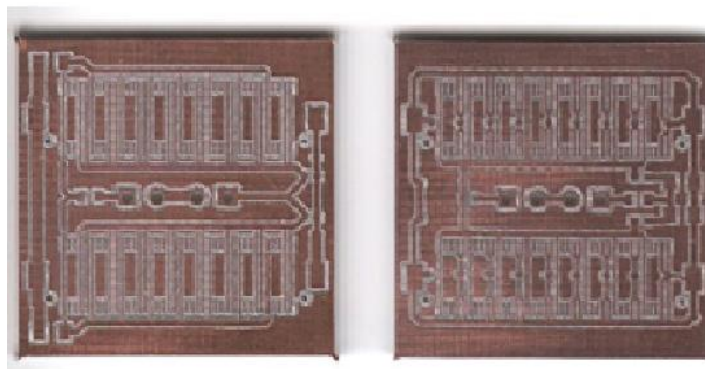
LEFT: PCB positive output - RIGHT: PCB negative output
